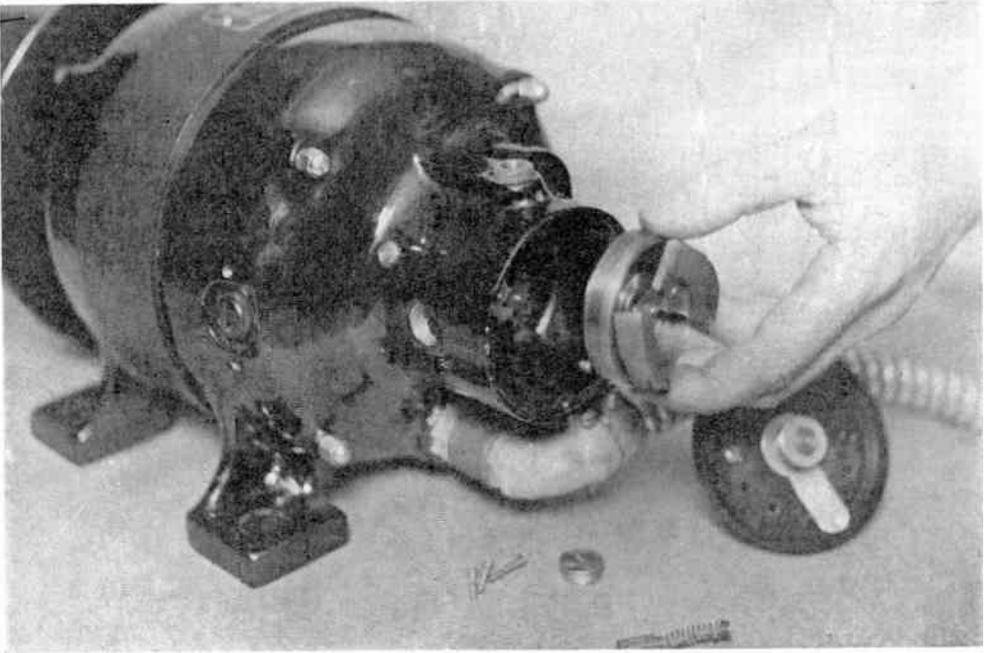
DISMANTLING THE D.C. TYPE PROJECTOR MOTOR. SECOND STEP. Slackening the grub screw which locks the rotary mechanism to the shaft.
